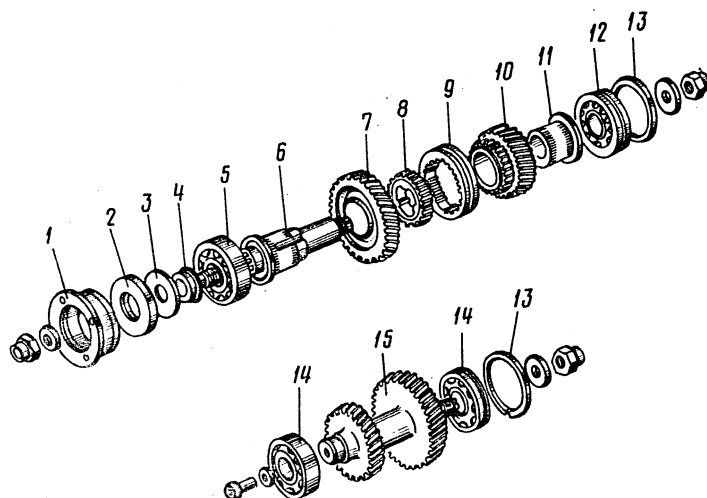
Parts of Drive Shaft and Countershaft:
